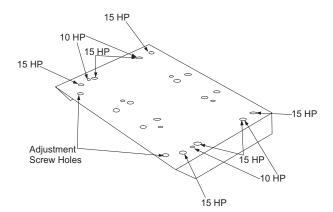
LB600 MOTOR MOUNT PLATE
